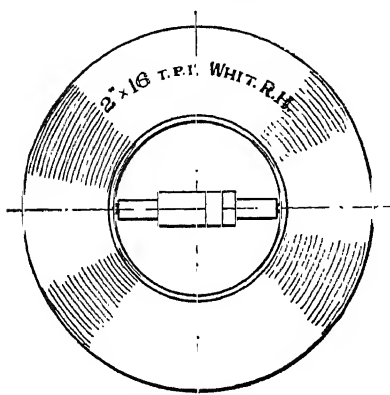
Effective diameter of screw ring gauge checked by steel balls, held in thread by petroleum jelly, and the dimension between balls found by slip gauges.
